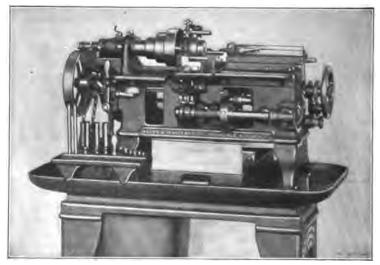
No. 00 Brown & Sharpe Automatic Cutting-off Machine, Front View
